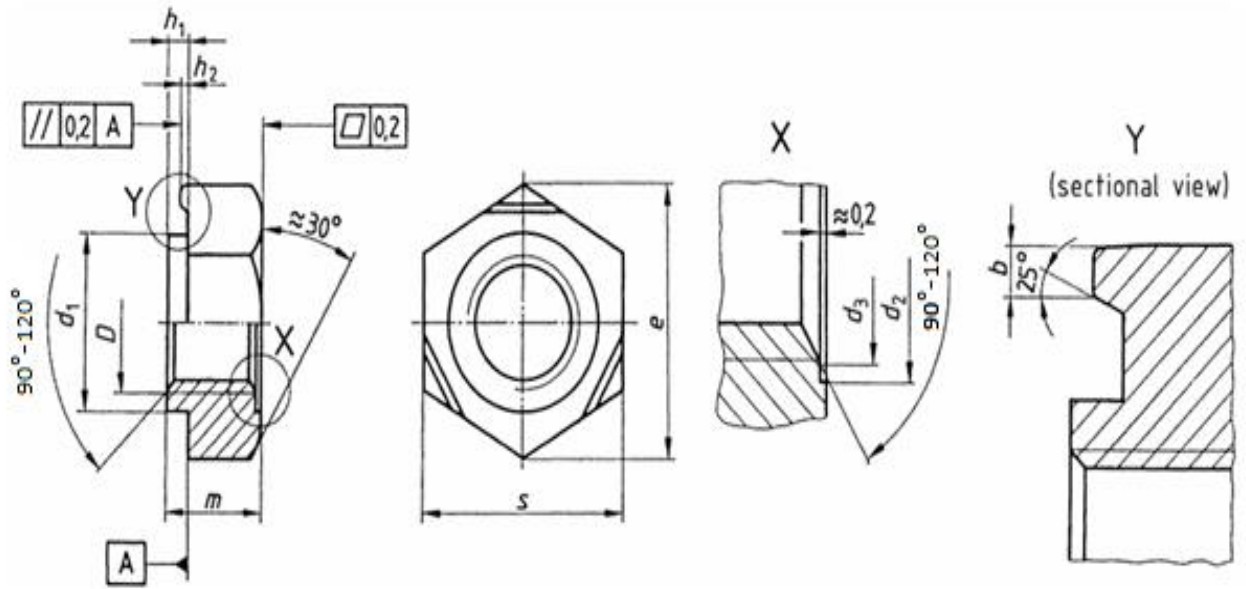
DIMENSIONS OF HEXAGONAL WELD NUTS (TYPE A1)
